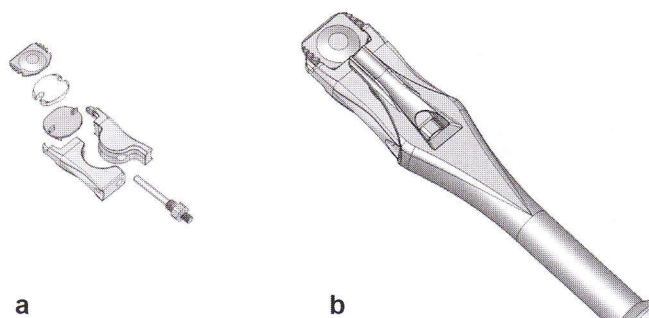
Sterile and disposable implant holder in which the disc replacement of the chosen size is pre-mounted. a: all of the parts artificially disassembled; b: definitive assembled implant holder and disc replacement
